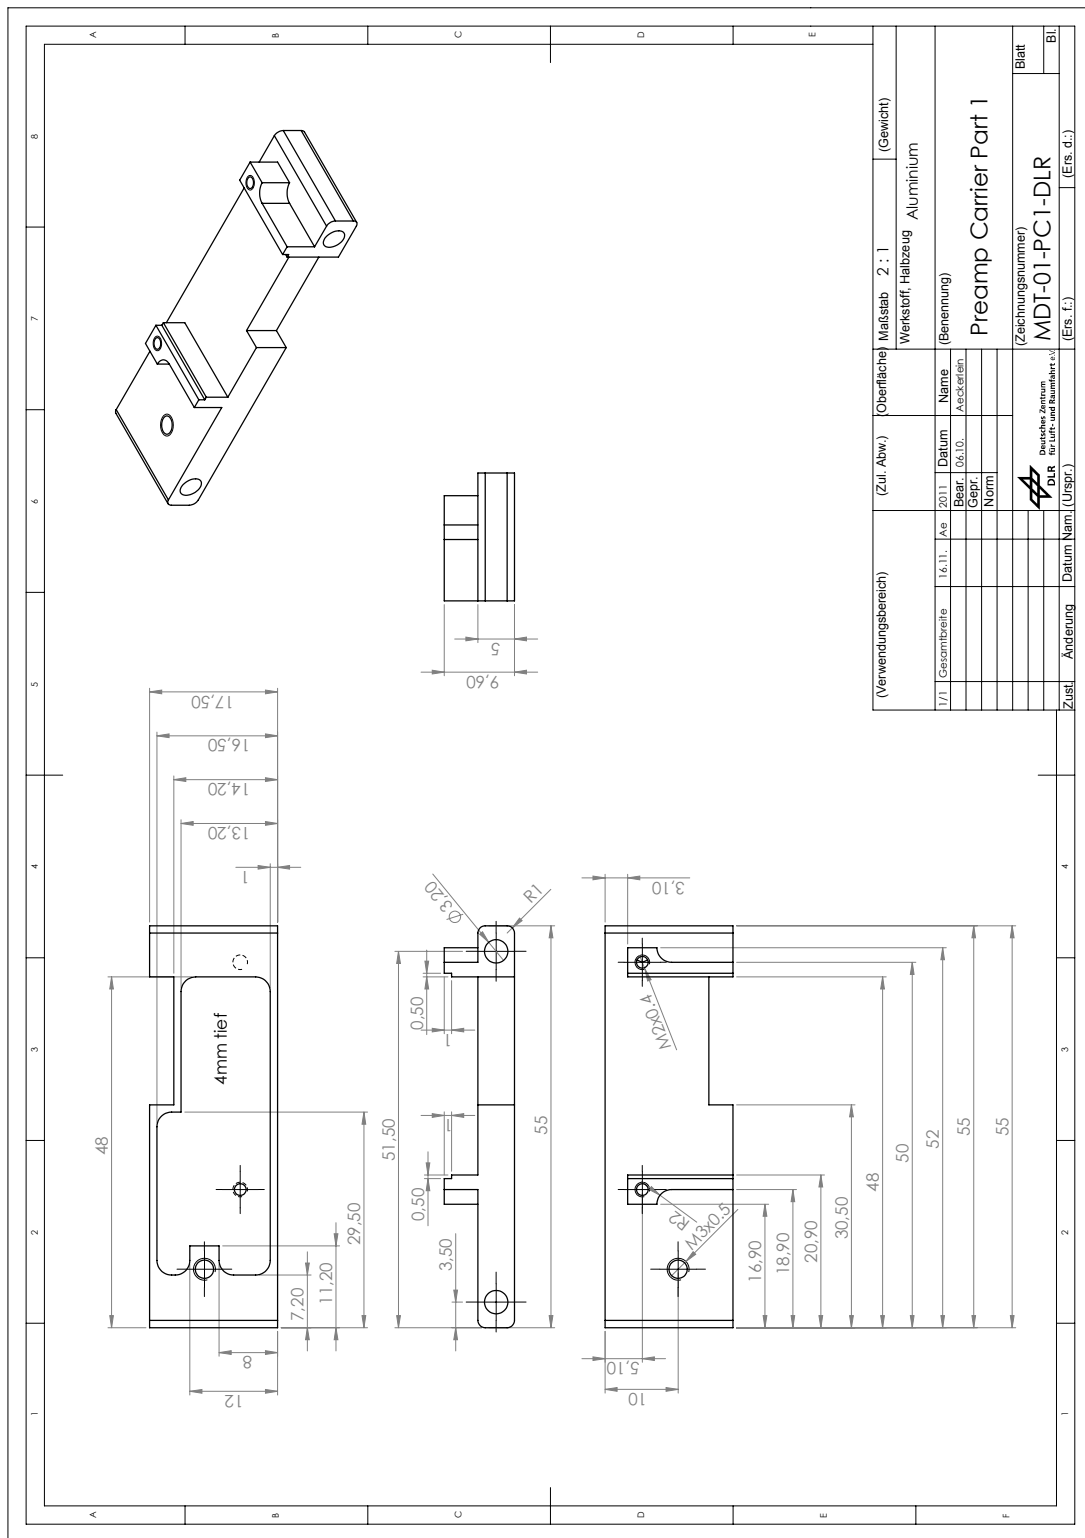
Technical drawing of the MDT-01-001 case – front end carrier I (Section 3.5.2).
